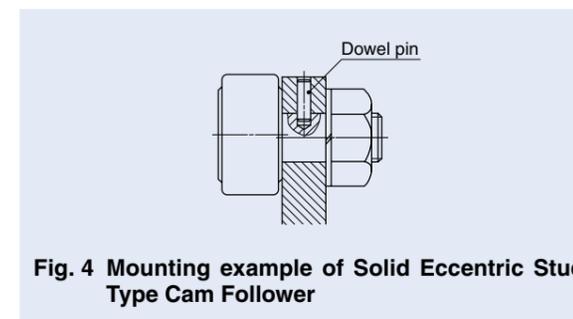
Mounting example of Solid Eccentric Stud Type Cam Follower
